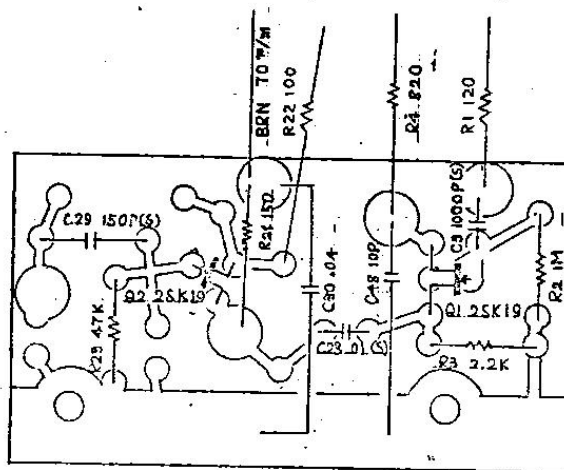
DX-120 SUB CIRCUIT BOARD & WIRING DIAGRAM (REAR VIEW) SERIAL NO. AFTER 7211
